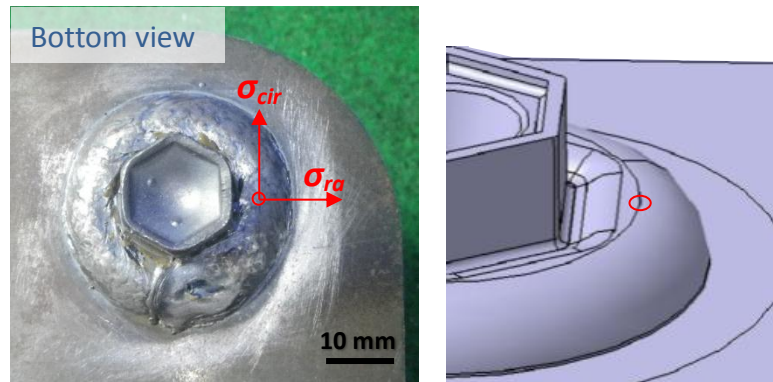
Schematic views of the measurement position at the weld bead
